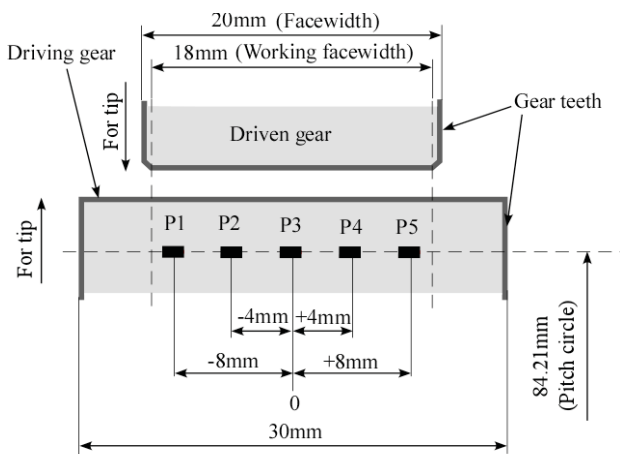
Location of pressure sensing point on a driving gear tooth (5-points)
